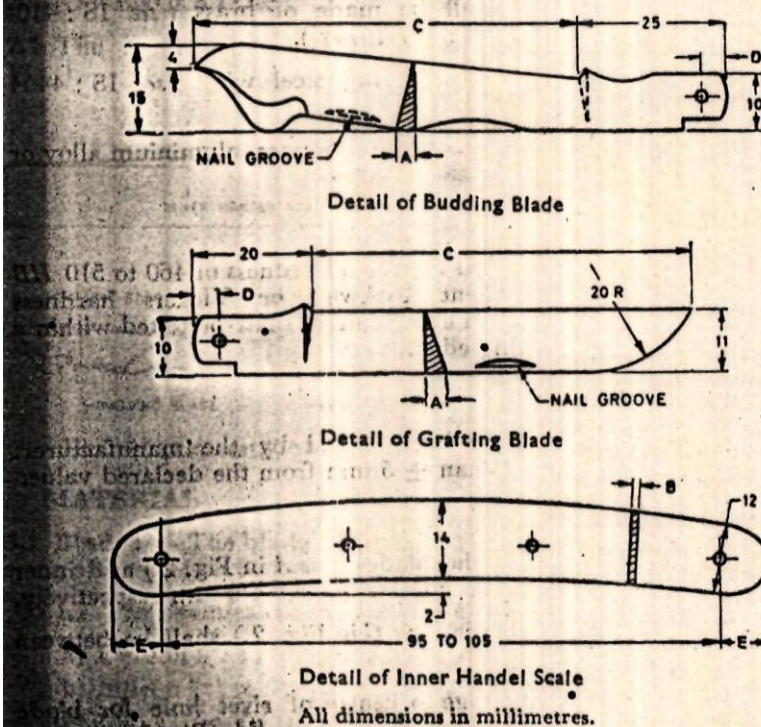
DIMENSIONS OF BLADES AND HANDLE SCALE FOR BUDDING AND GRAFTING KNIFE, COMBINED
